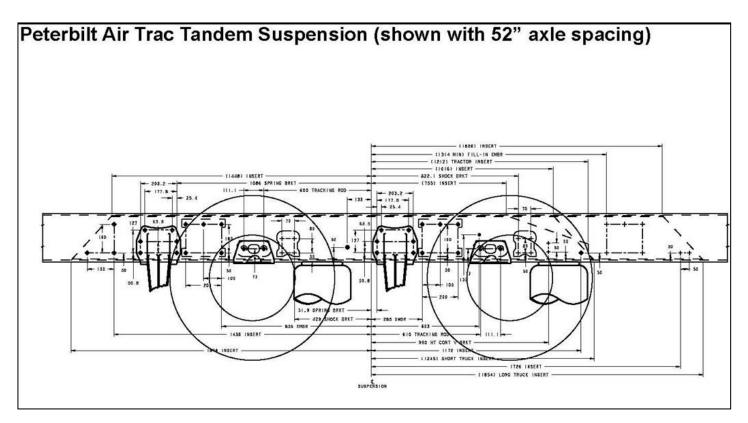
Peterbilt Air Trac Tandem Frame Drilling (Dimensions In Millimeters)
